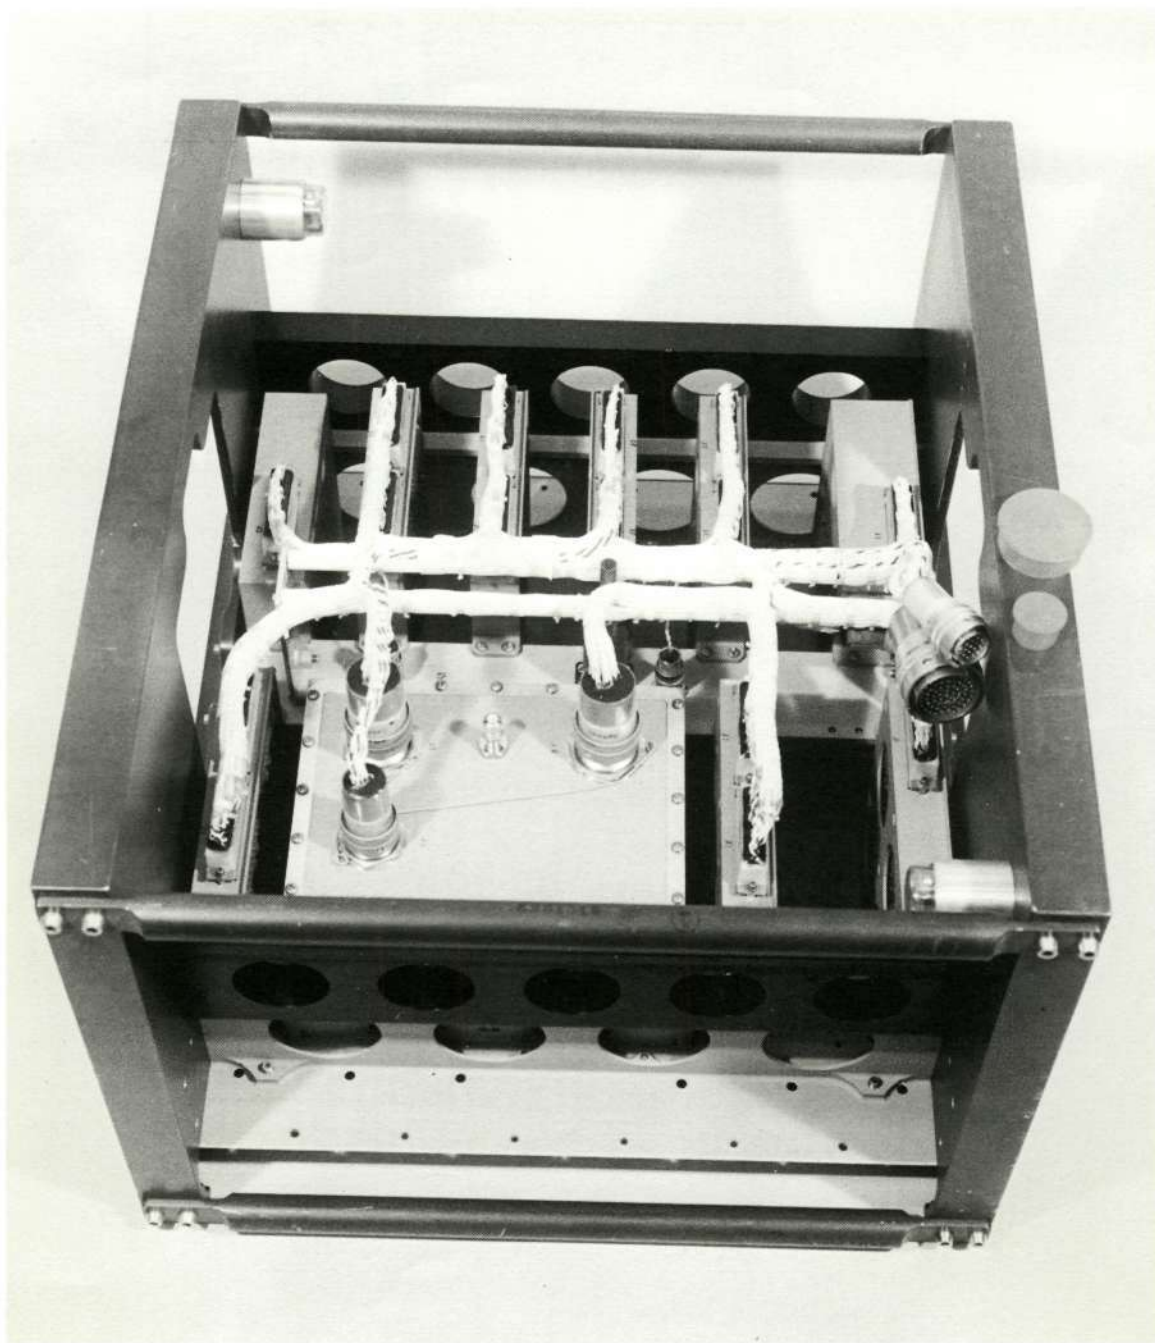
Proof test model DSS mounted in a chassis and held in its handling fixture
